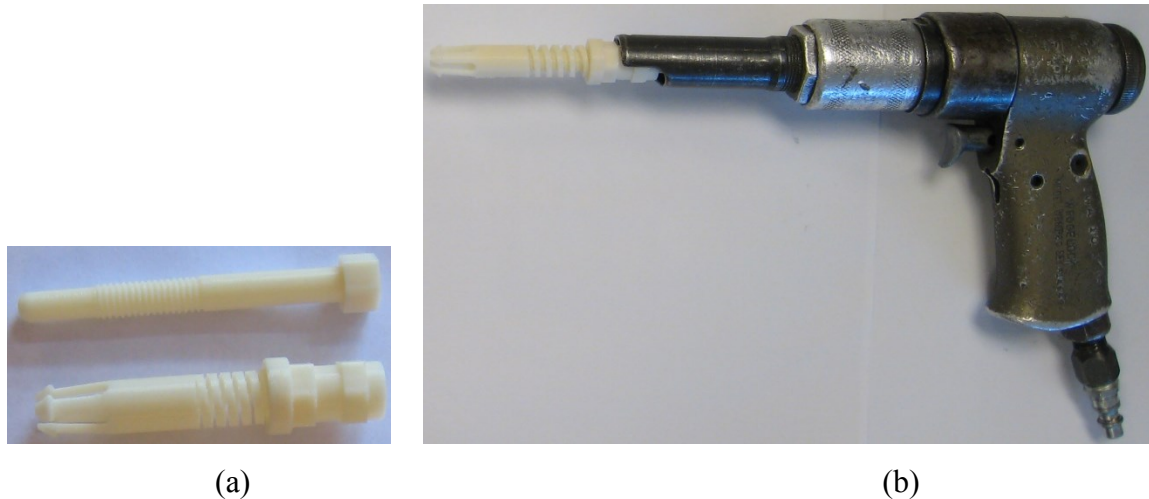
Rapid prototype for the existing fastening tool: (a) Rapid prototype and (b) model installed in the fastening tool
